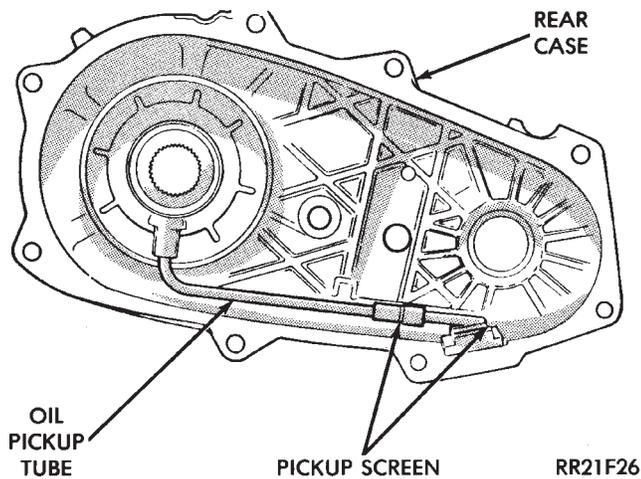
Pickup Tube, Oil Screen And Pump Installation
